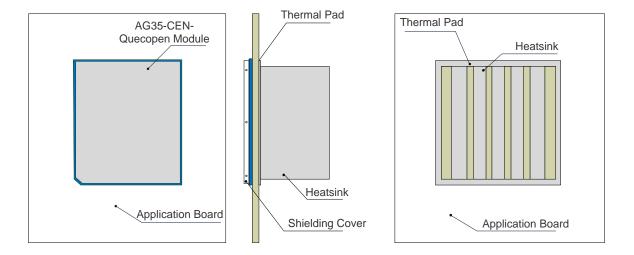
Referenced Heatsink Design (Heatsink at the Backside of Customers' PCB)
